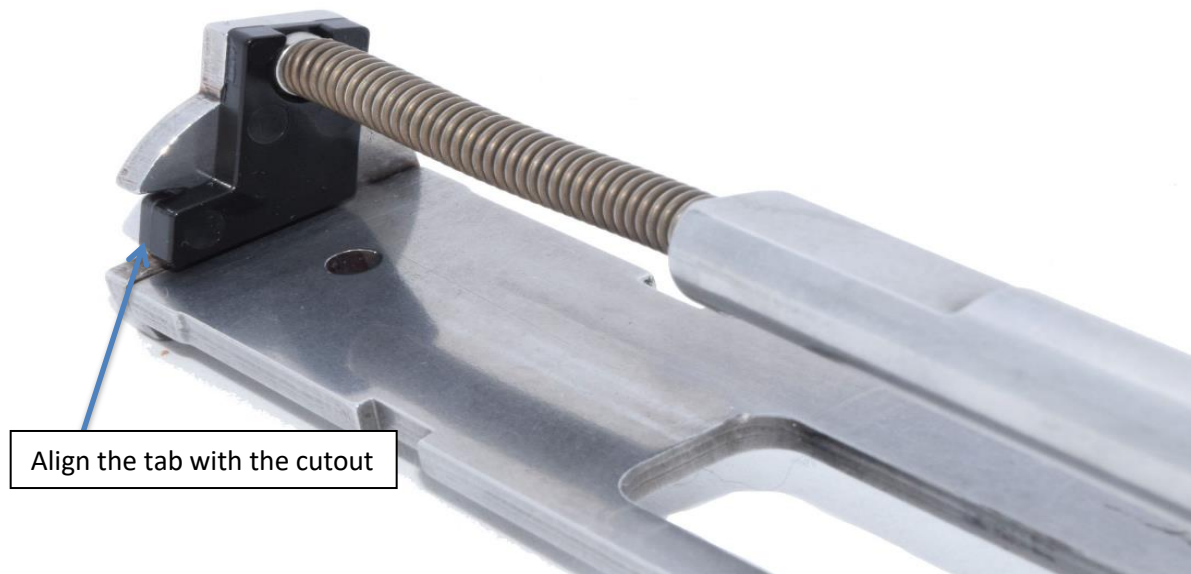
Shows how the Bolt Buffer should be positioned after installing
